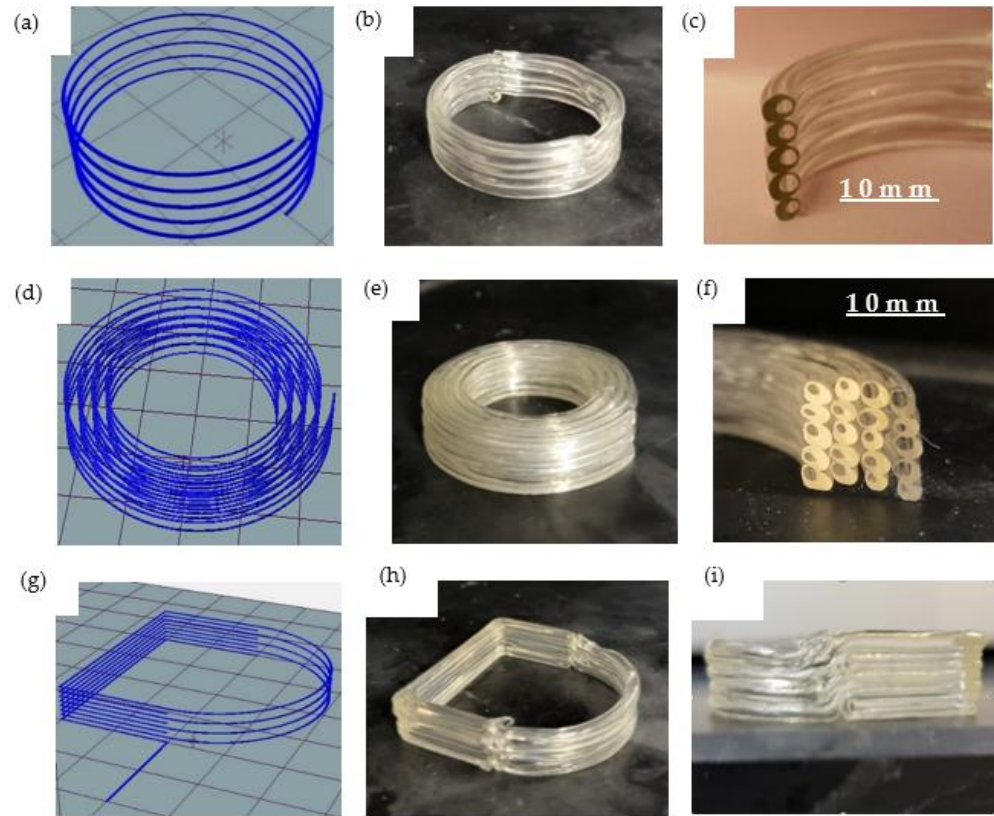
Spiral Cylindrical Printed Part: (a) Print Path Preview; (b) Printed Part; (c) Cross-section. Multi-layer cylindrical part: (d) Print path preview; (e) Printed part; (f) Cross-section. Part with gradient density: (g) Print path; (h) Printed part; (i) Front view.
